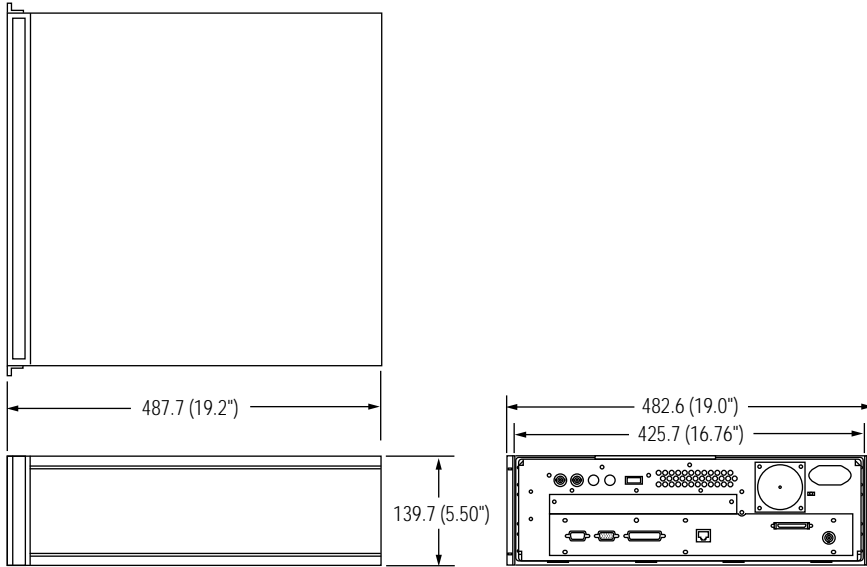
HP 16600A series exterior dimensions. Dimensions: mm (inches).
